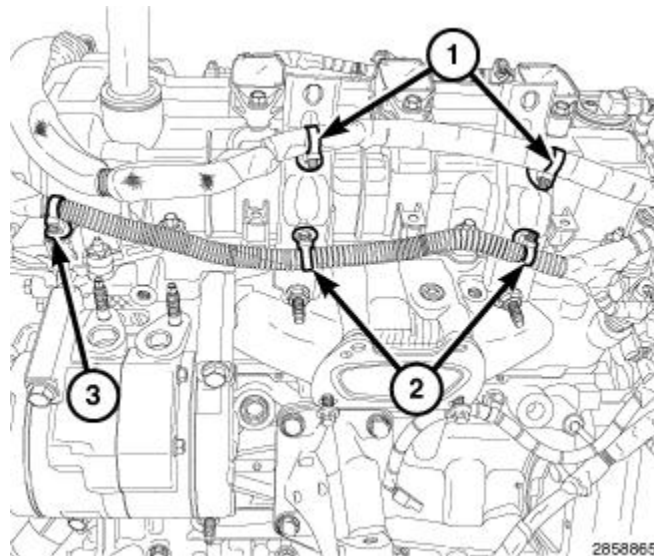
Starter Wire Harness Retainers, Main Wire Harness Retainer & Manifold Support Bracket Retainers
